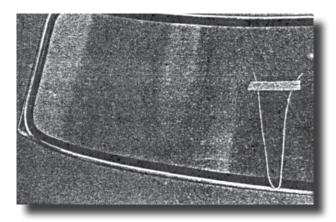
Cord in Pinch.Weld Cavity
